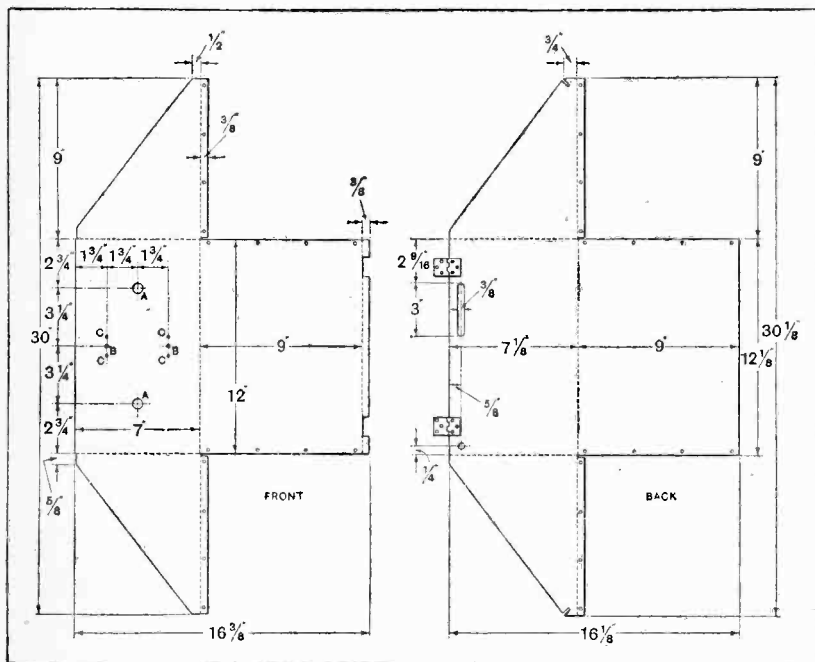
Constructional details of the front and back sections of the metal case. Positions for the panel holes are shown. A, 9/16in.; B, 3/8in.; C, 5/32in.
